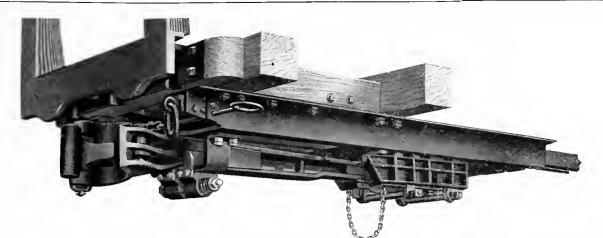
Gould Steel Platform, with Friction Buffer and Draft Gear.
